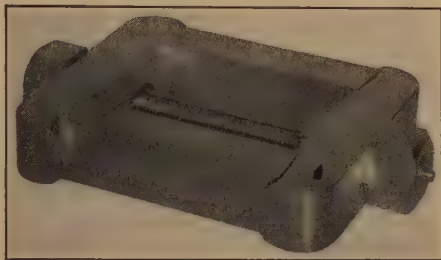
DIRECT TENSION STRESS-CORROSION FIXTURE.
